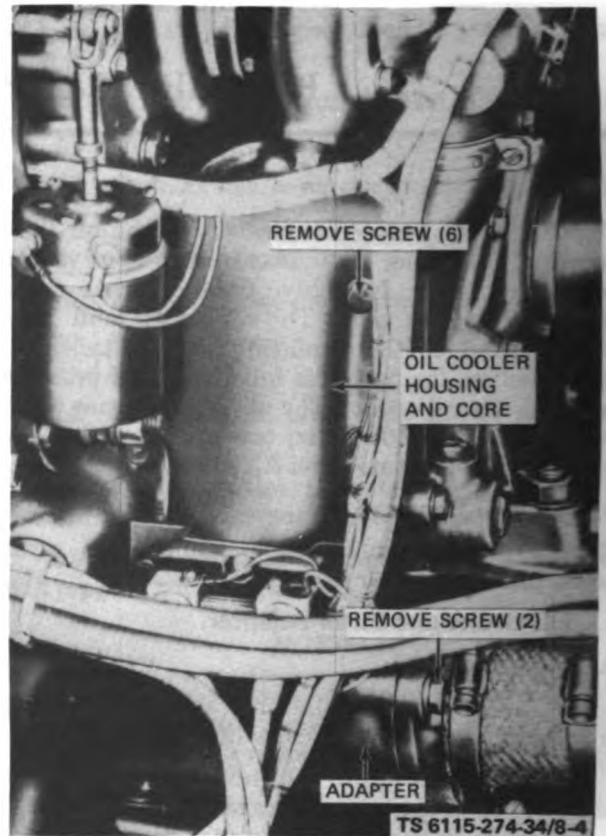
Oil Cooler Housing and Core and Adapter, Removal and Installation
